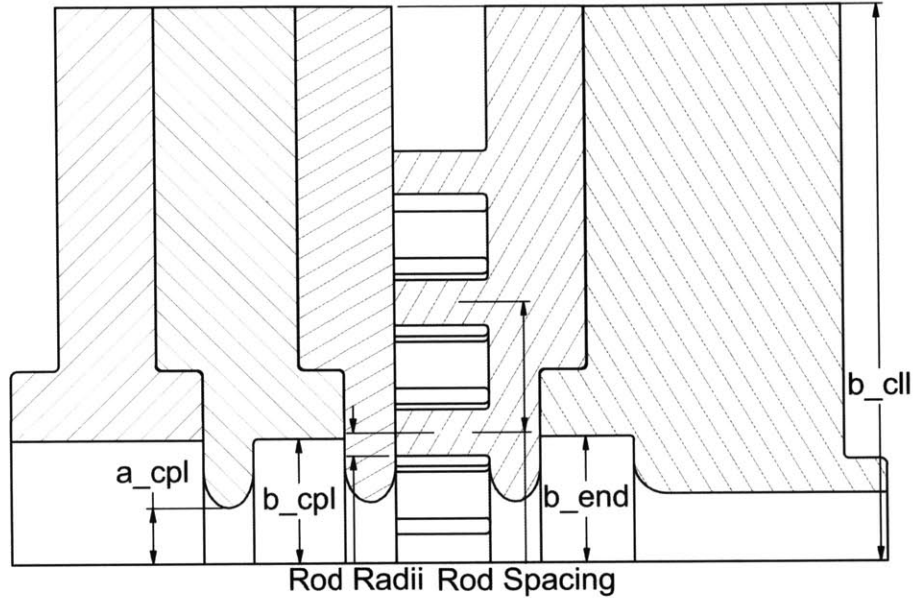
Axisymmetric views of the assembly drawing of the 17 GHz PBG structure showing the tuning parameters for the structure.
